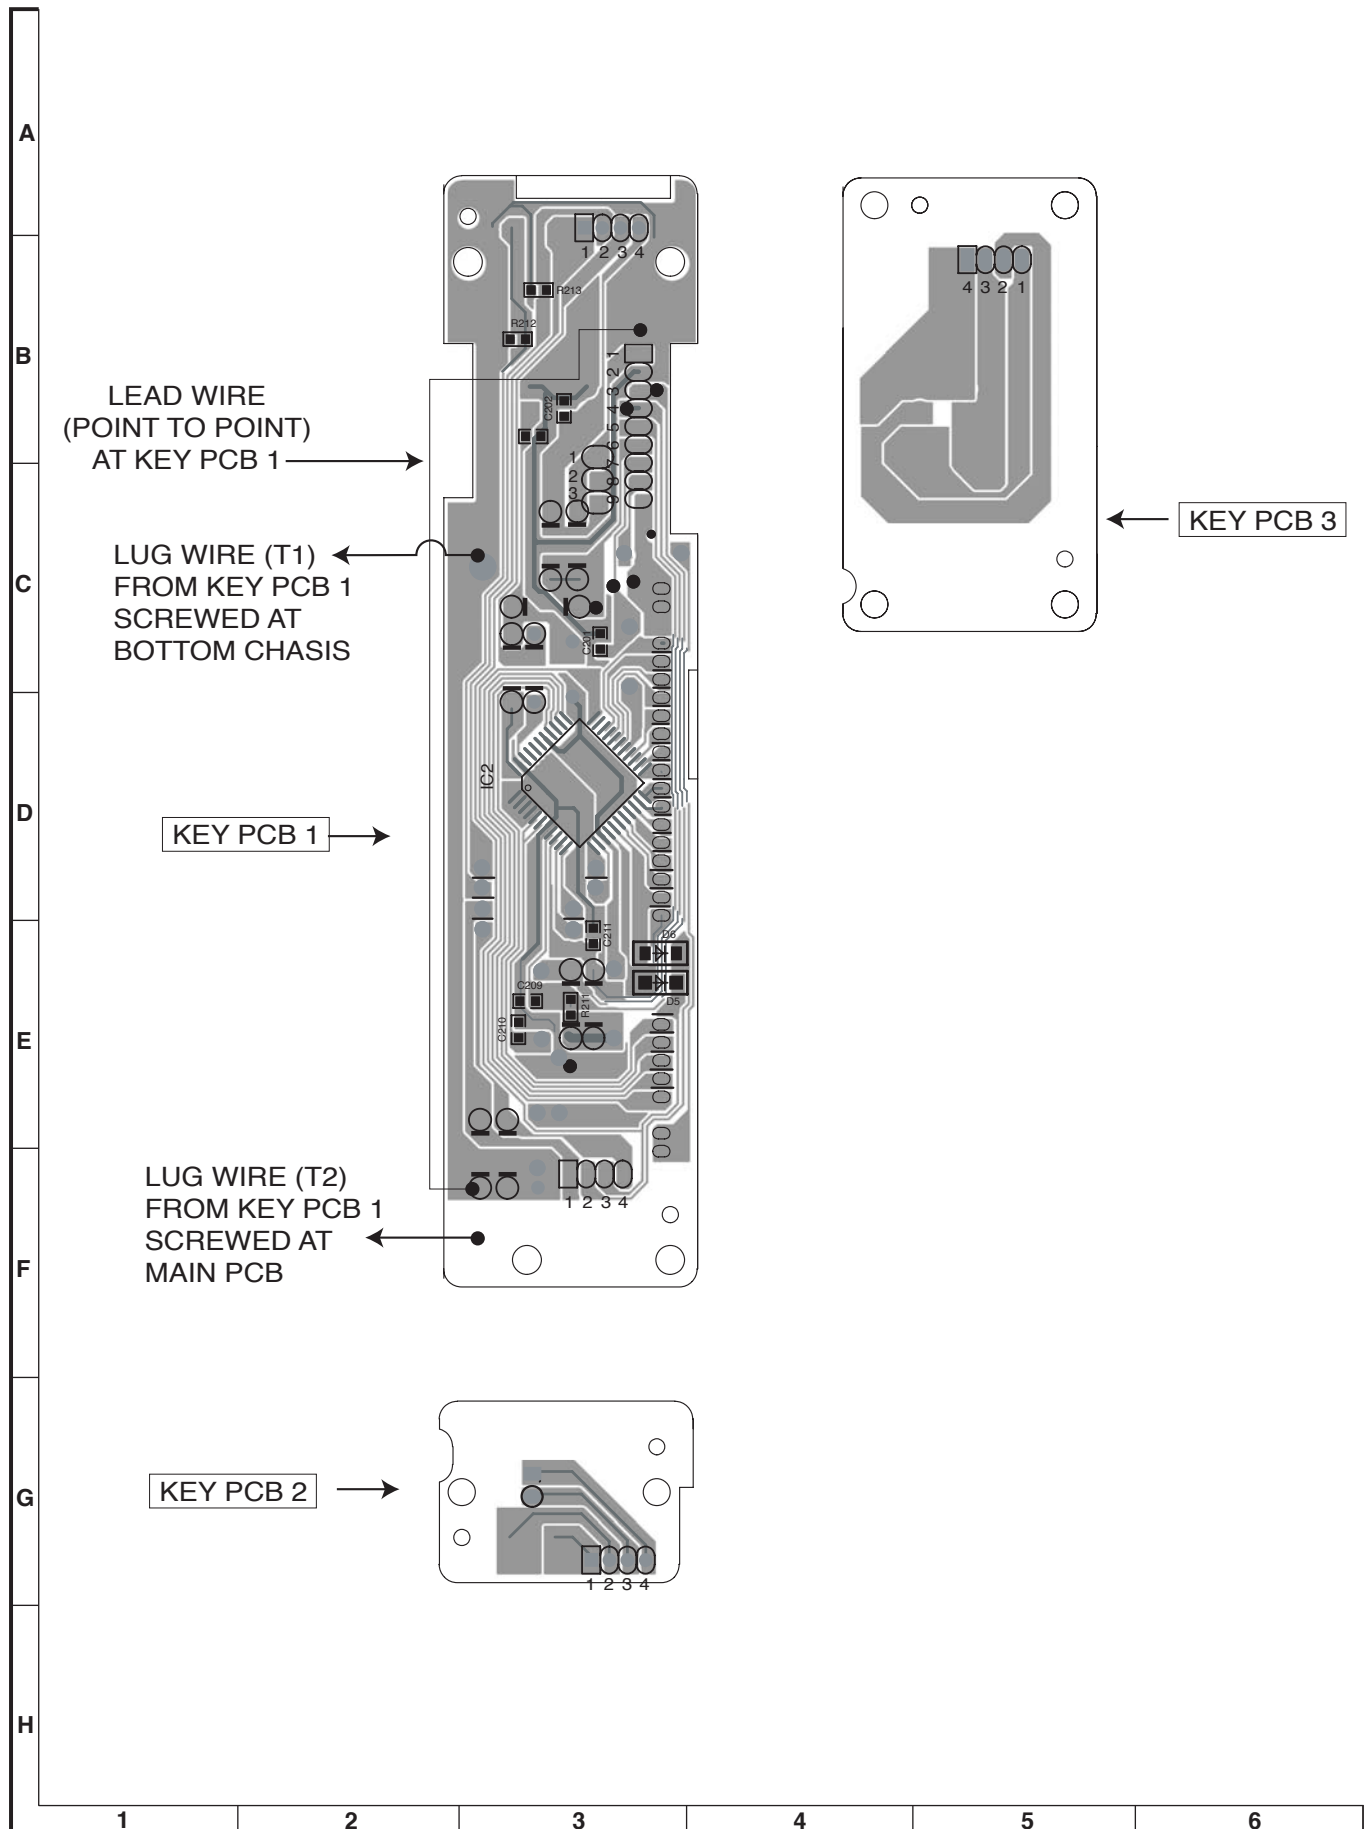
WIRING SIDE OF KEY PCB (BOTTOM VIEW)
